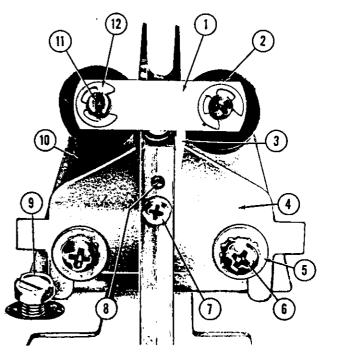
BRACKET AND ROLLER ASSEMBLY, LIFT ARM GUIDE
